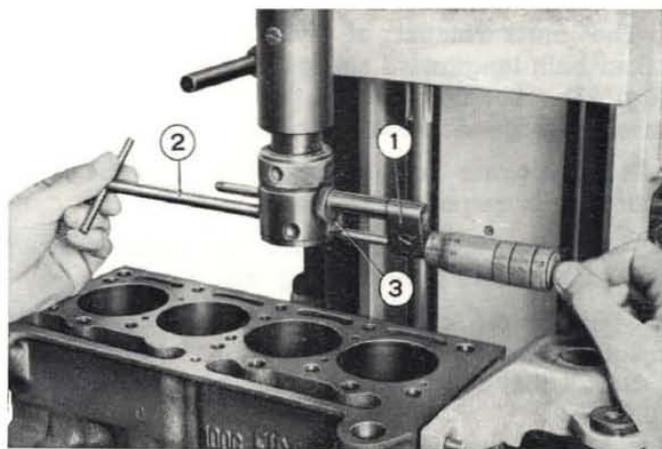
Measuring cutter projection, preparatory to boring operation.
